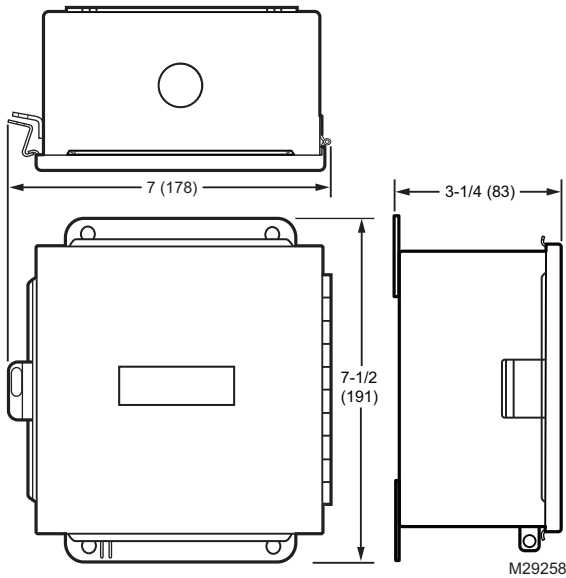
Class 500 meter enclosure dimensions in in. (mm).
